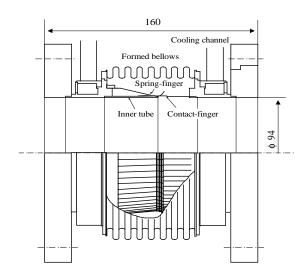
Schematic drawing of the bellows assembly for the LER of KEKB.
